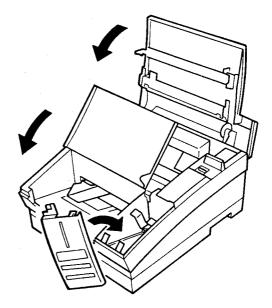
Holding the Control Panel and Adjusting VR1A
